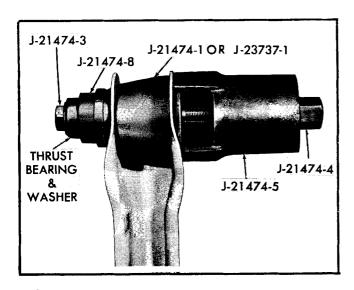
Removing Upper or Lower Control Arm Bushing (Coil Spring Suspension)
